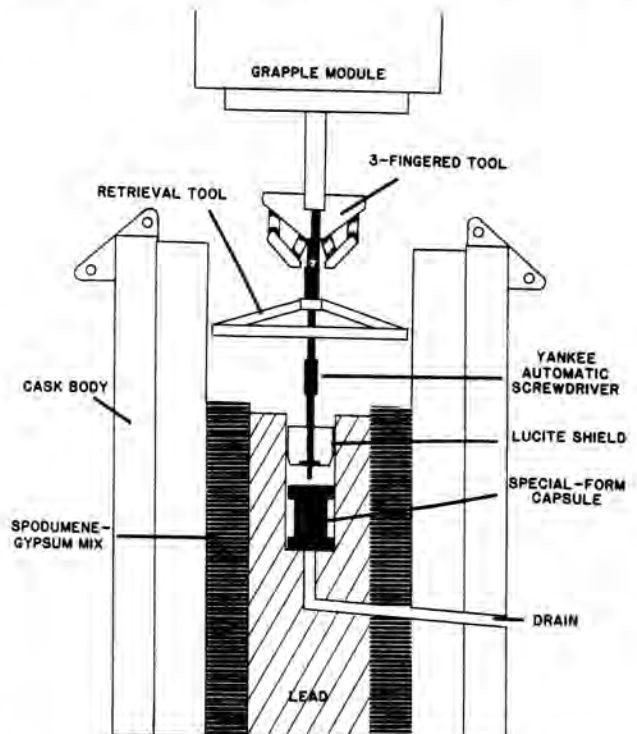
LLNL Model 4-T shipping cask and specially designed retrieval tool.
